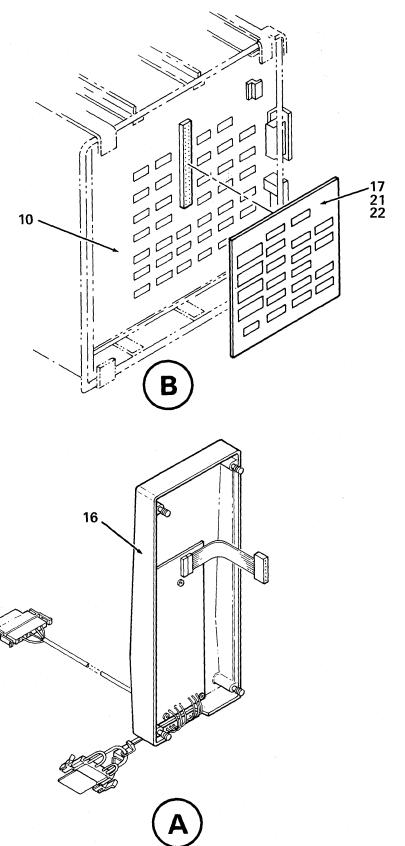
VT100 Unit Assembly (Sheet 1 of 2)
